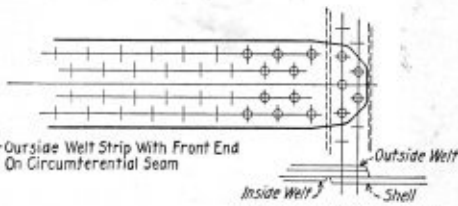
Outside Welt Strip With Front End On Circumferential Seam
